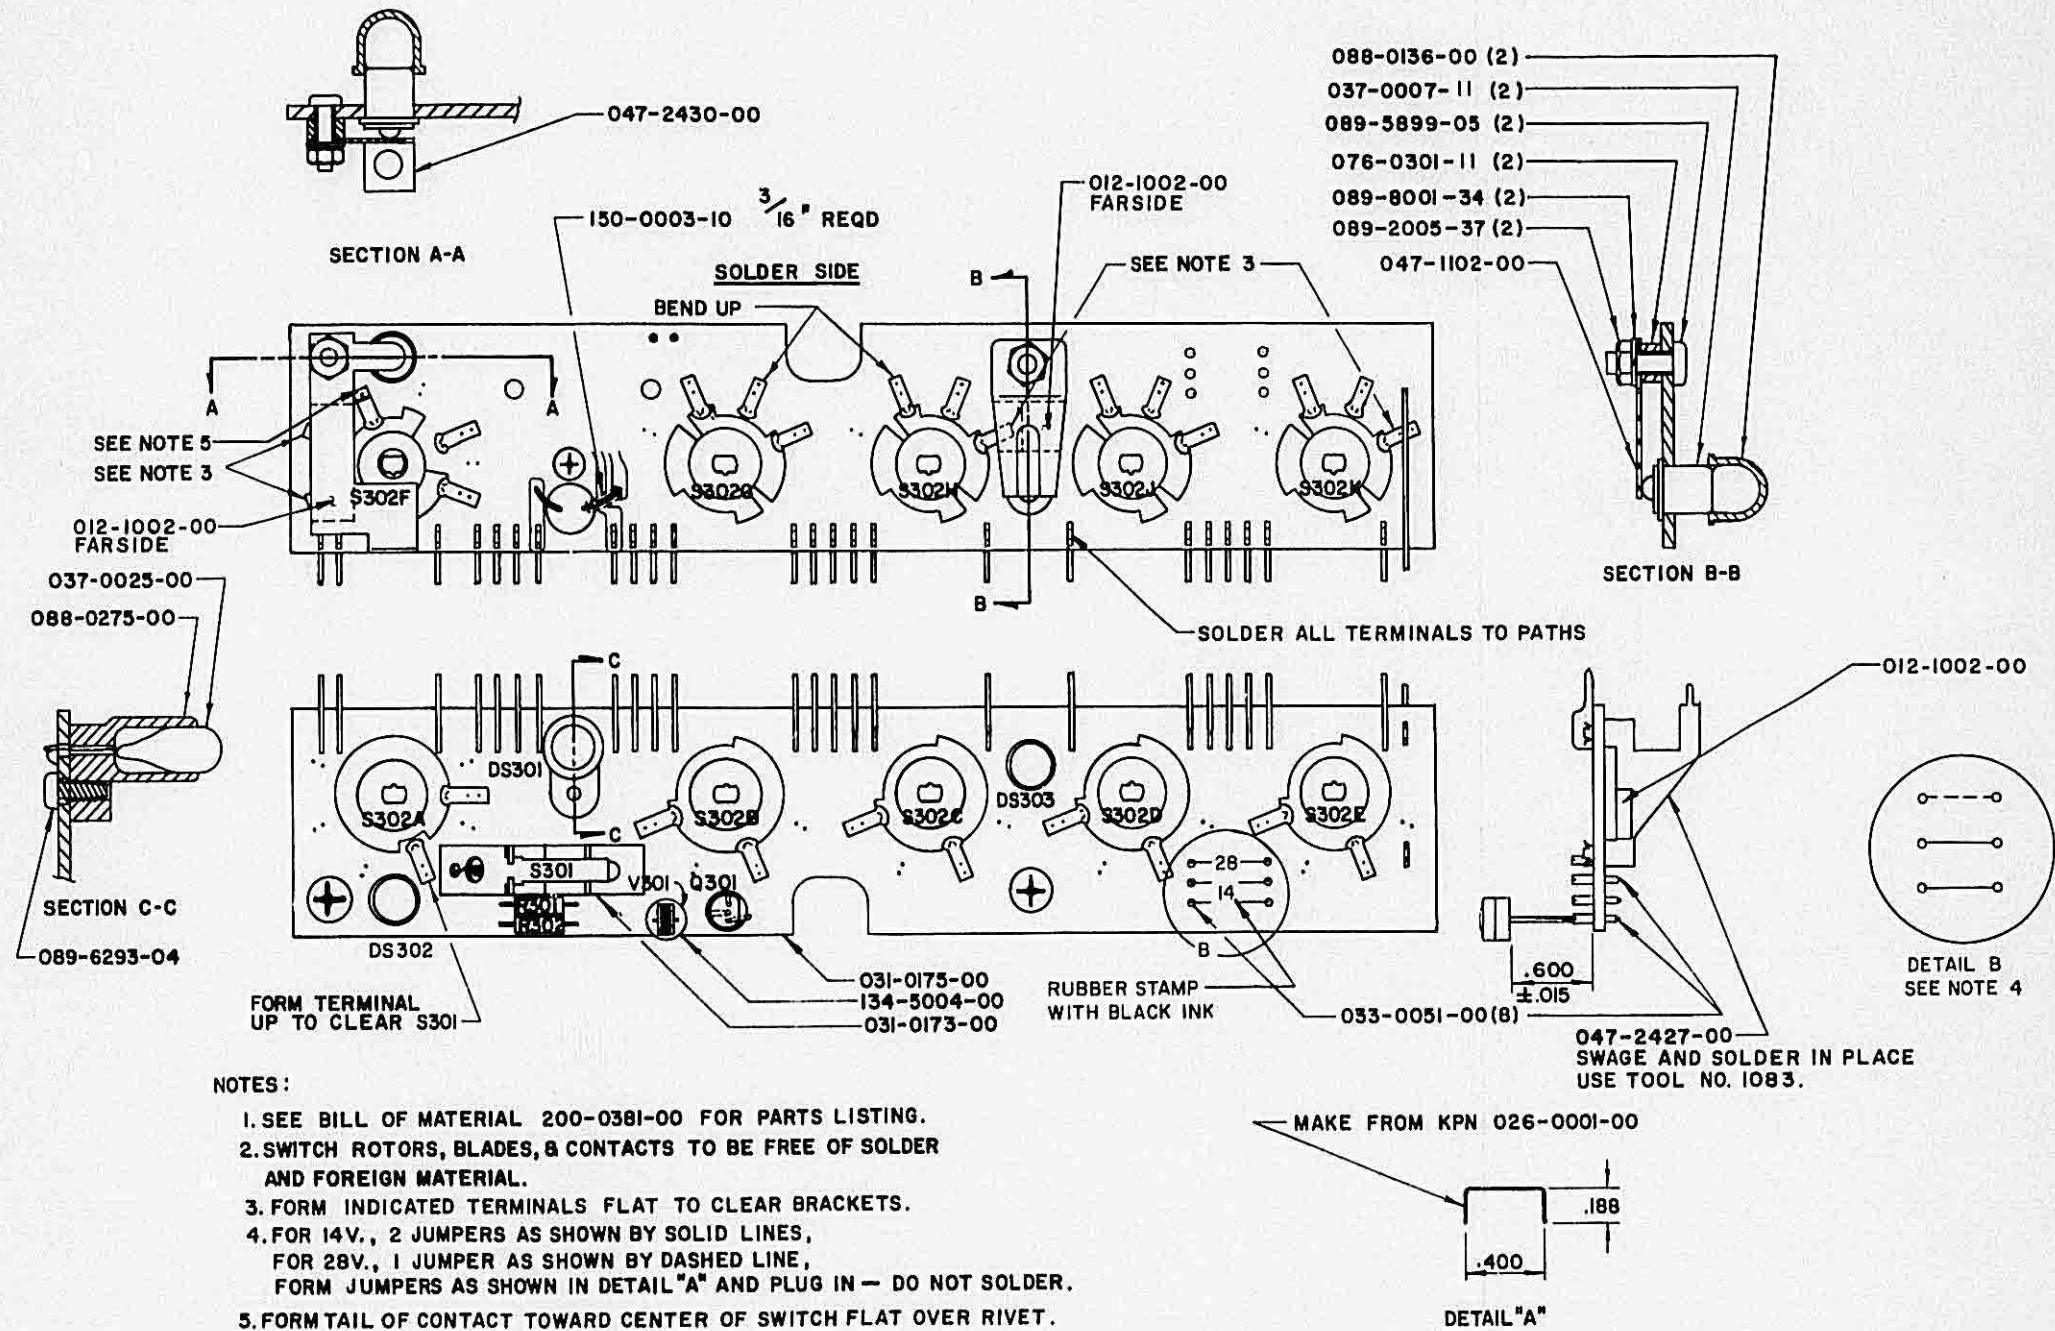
SWITCH BOARD ASSEMBLY
